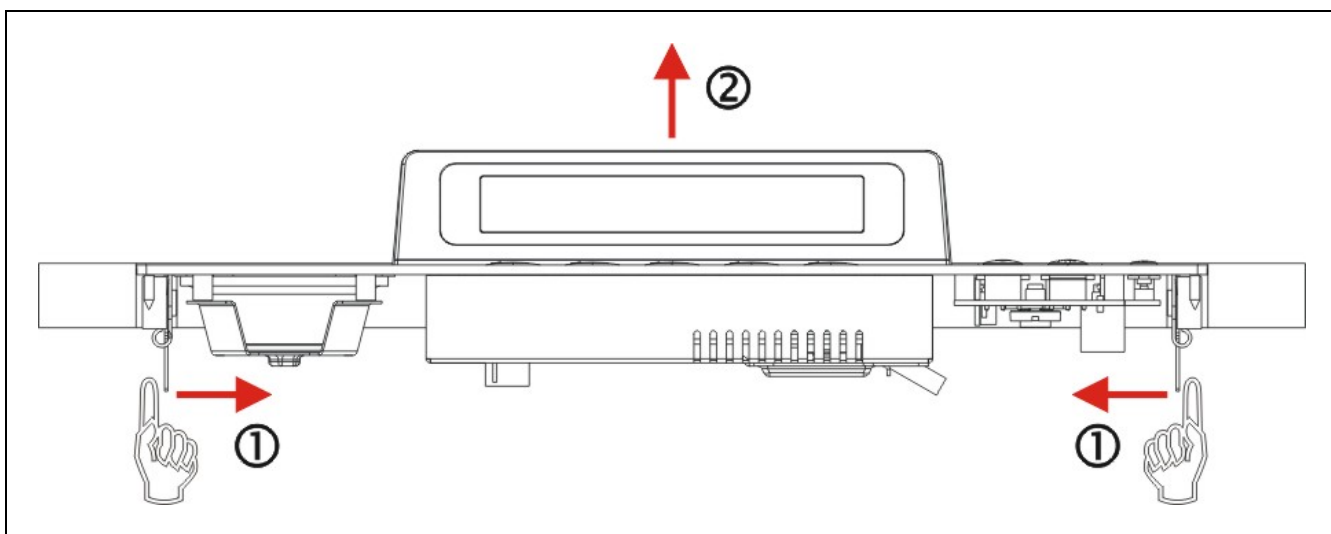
Disassembly of HCS-48U8 and HCS-48U9 series flush-mounted congress unit (method b)
